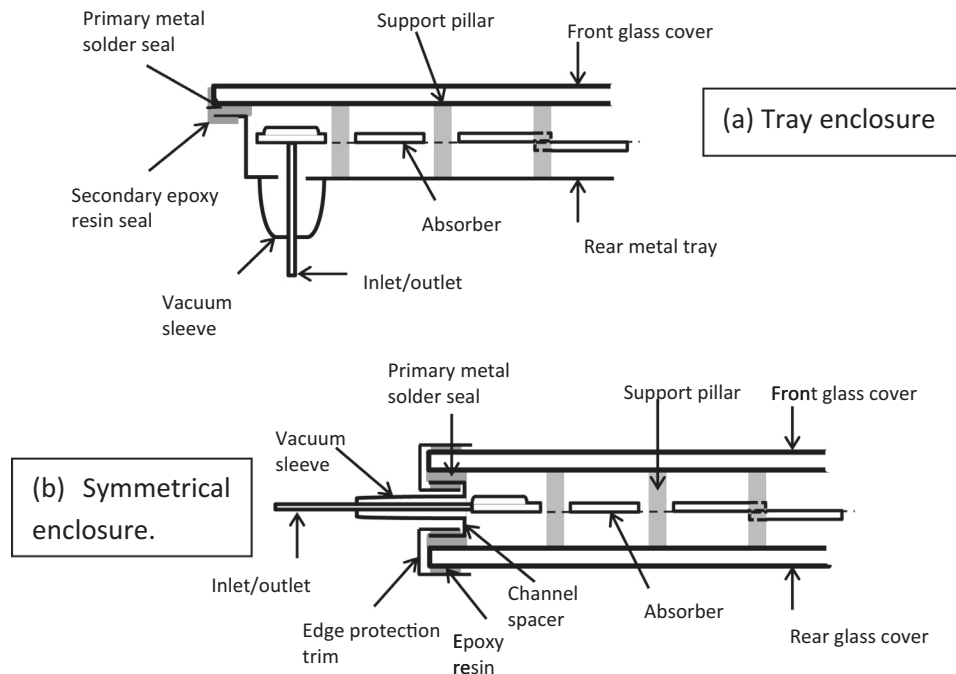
Cross-sections showing the coolant feed pipe connections, edge seals and pillar geometry: (a) tray enclosure, (b) symmetrical enclosure.
